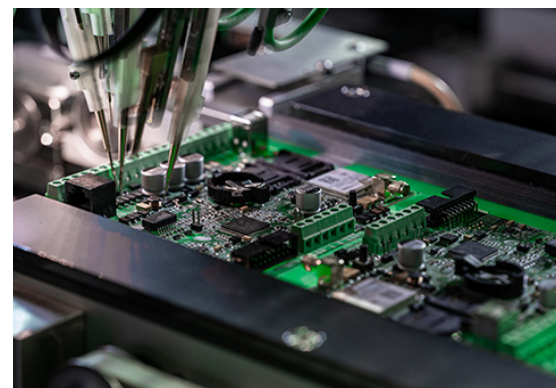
Shown here is the automated soldering of chip components onto a PCB. (Image source: Dreamstime)
